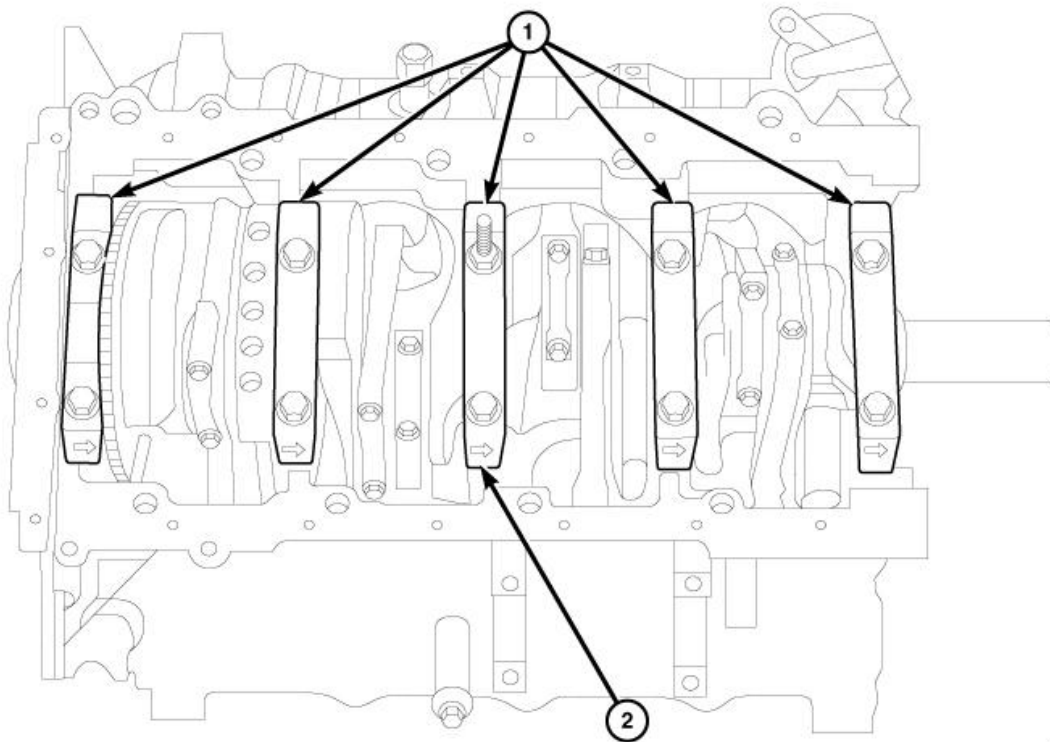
Marking Connecting Rod & Bearing Cap Positions
